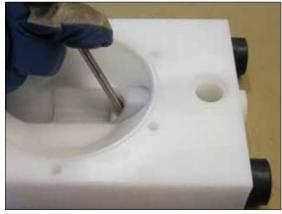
Push out the lower sleeve (212) and valve seat (222) by means of one of the pin screws.
